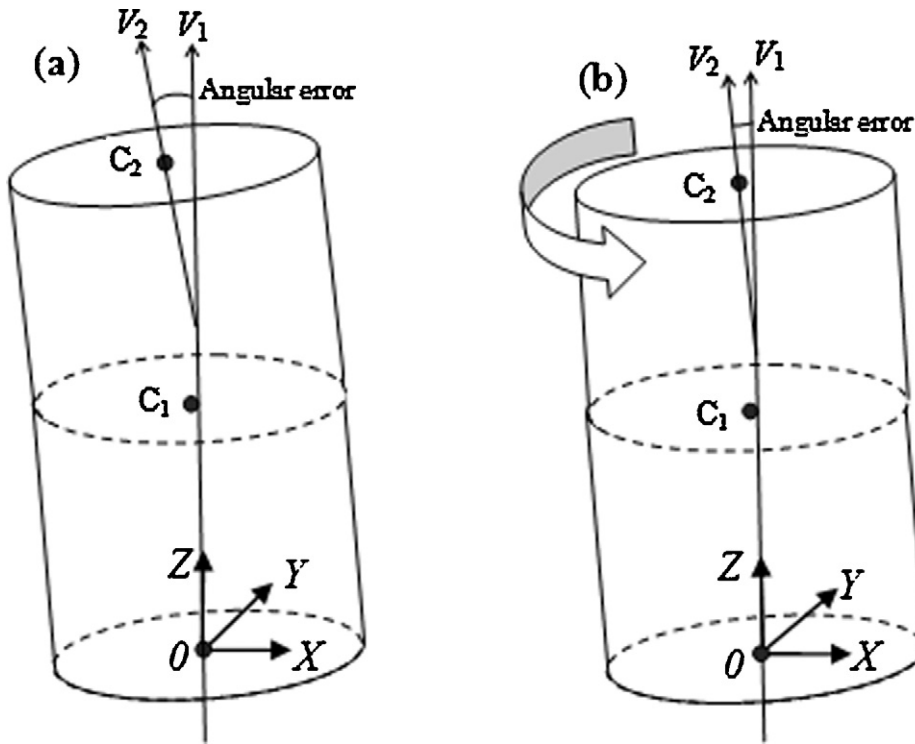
Parallelism-build assembly. (a) Without rotating components against each other, (b) with preferred orientations to minimize angular error.
